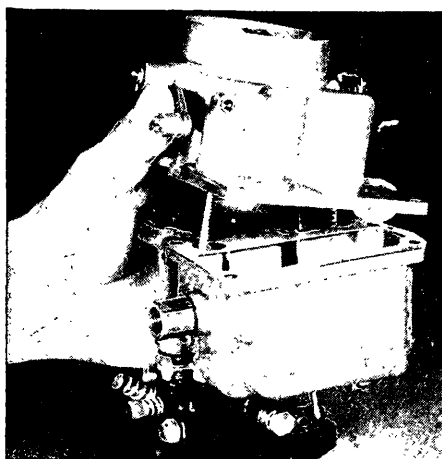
Assemble air horn on main body. Connect fast idle rod and make certain that linkage moves freely
